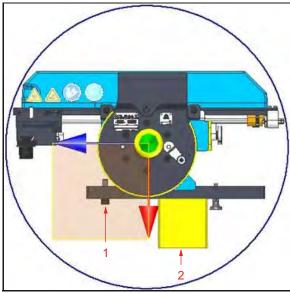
FF5300 WITH SHORT MACHINING ARM
